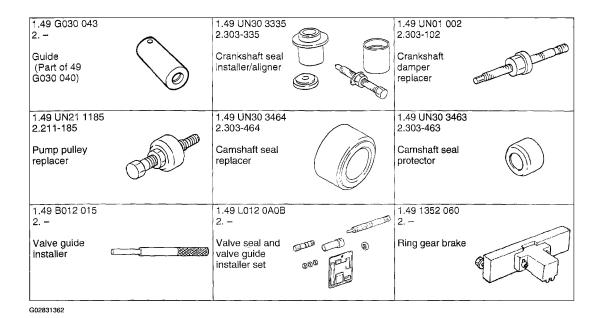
Identifying Engine SSTs (2 Of 2) Courtesy of MAZDA MOTORS CORP.
